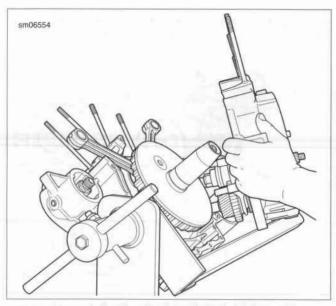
Assembling Crankcases With Crankshaft Guide Tool (Part No. HD-42326-A)
